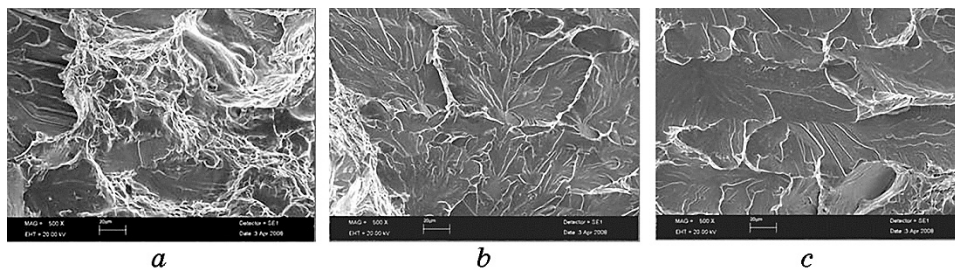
Micrographs of the fatigue fracture surfaces of the specimens observed by SEM: 2000 W (a), 2250 W (b), 2500 W (c).
